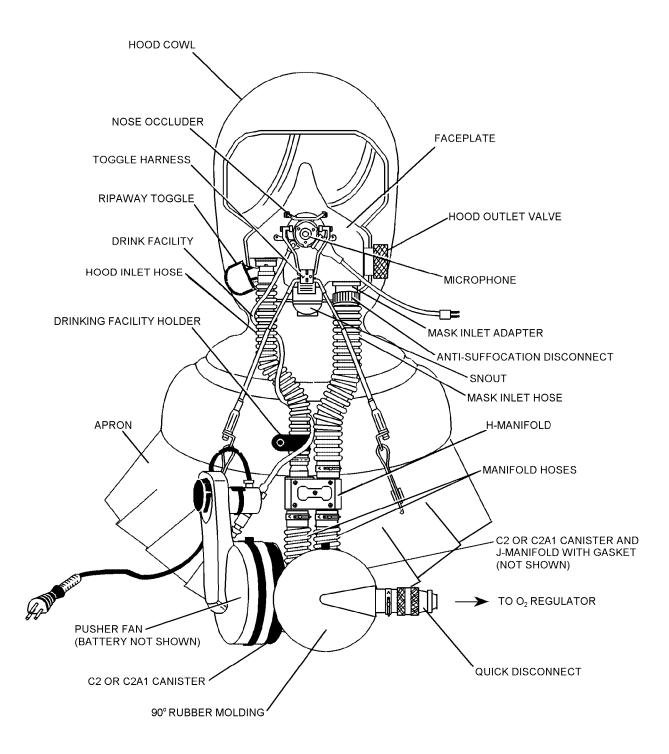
A/P22P-14(V)4 Respirator Assembly - Panel Mount Variant
